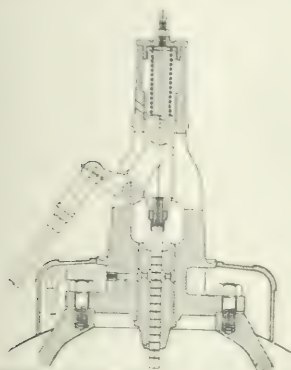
Admission Valve Mechanism, Showing Roller Contact, Valve Stem, Etc.
